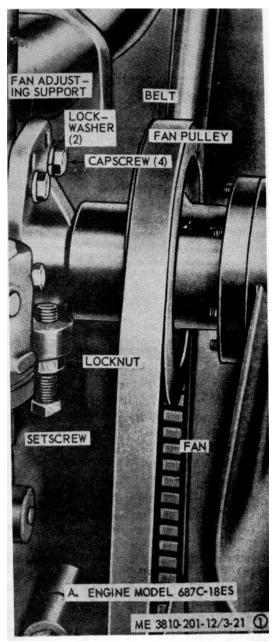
Fan drive belt adjustment (sheet 1 of 2).
